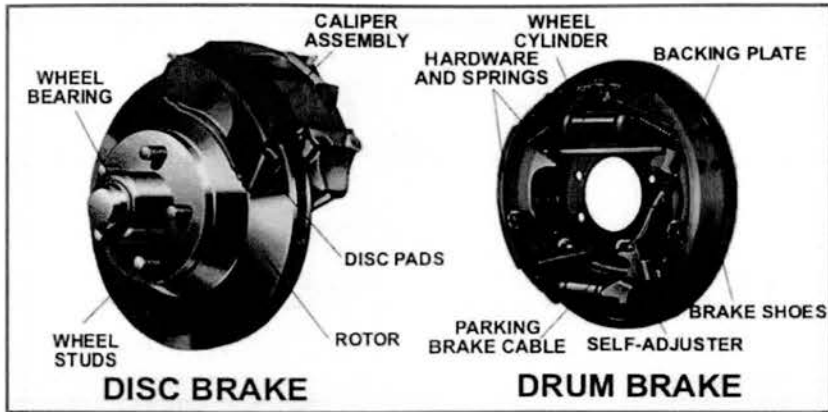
The component of the disc brake and drum brake (Motorist, 2018)
